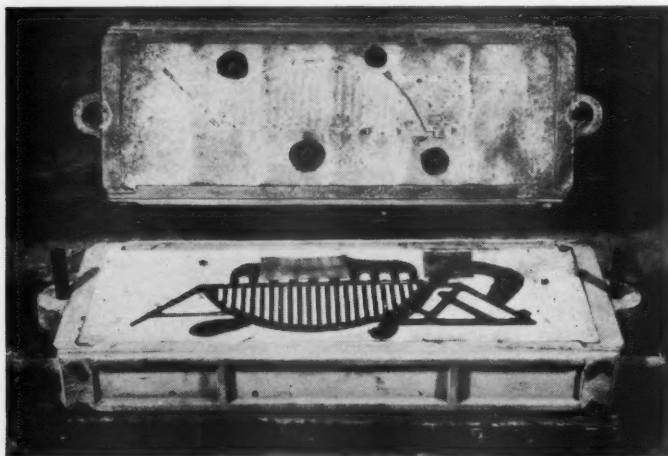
OPEN MOLD FOR MAGNESIUM-ALLOY CASTING SHOWING GATING METHODS AND SKIMMERS IN THE GATE IN PLACE.
